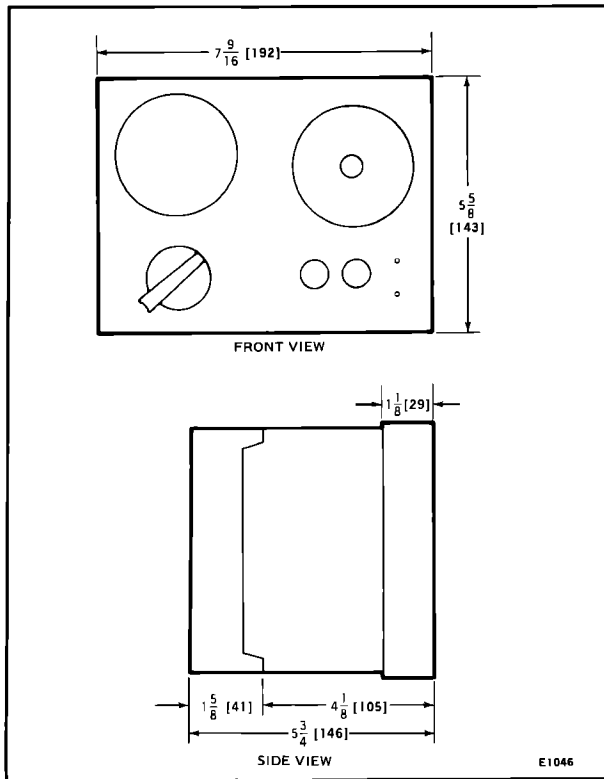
W964F DIMENSIONS IN in. [mm IN BRACKETS].
